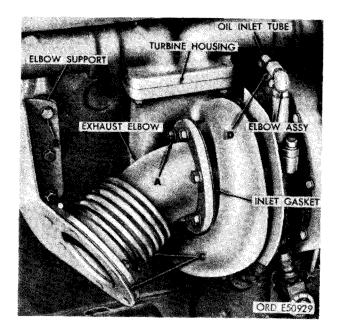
REMOVING OR INSTALLING TURBOSUPERCHARGER ELBOW AND DIS-CONNECTING OR CONNECTING TURBO-SUPERCHARGER OIL INLET TUBE (EARLY MODEL ENGINES).
